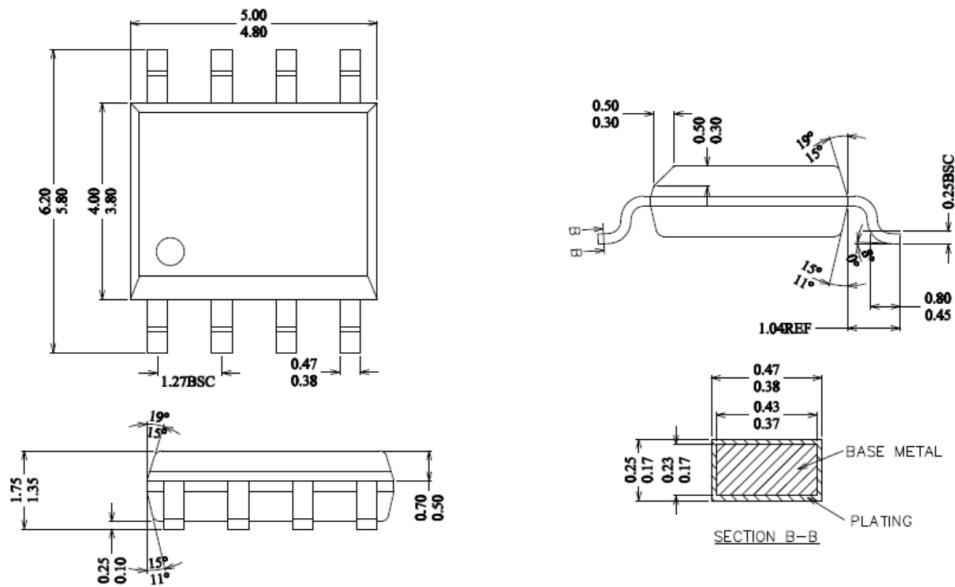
8-Lead Narrow Body SOIC [NB SOIC-8] Package-dimension unit(mm)
